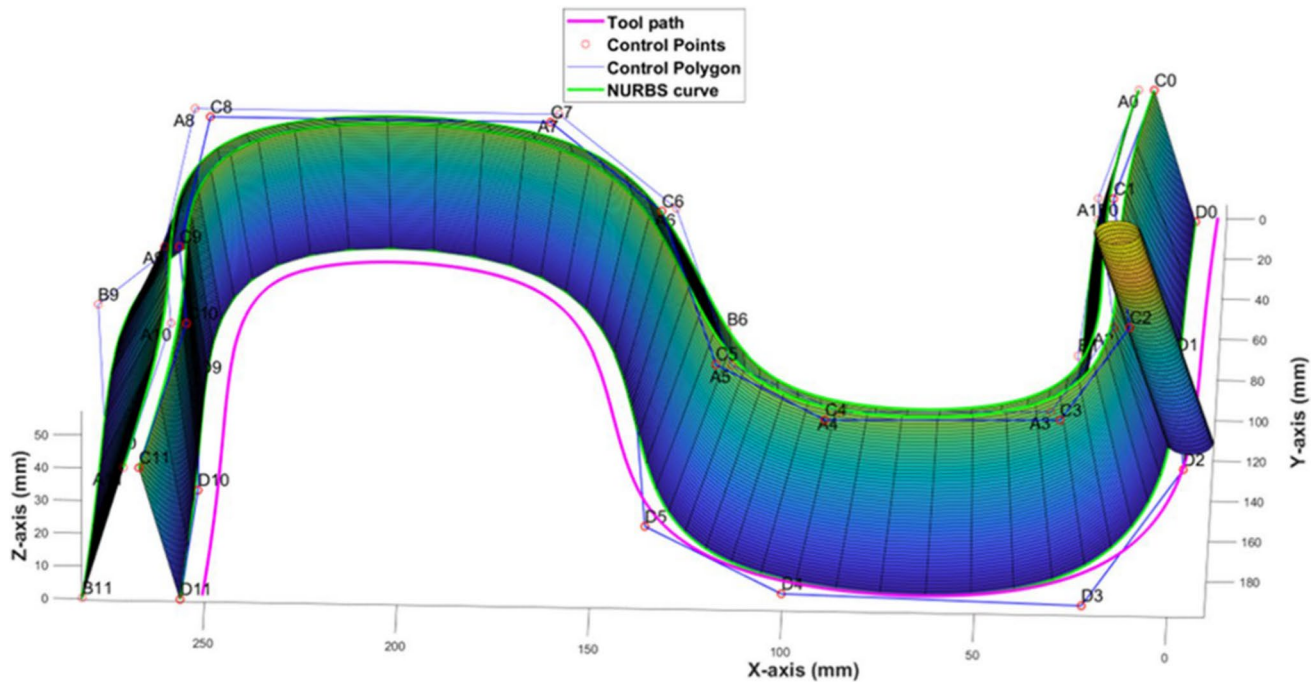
Development of the two surfaces of the S-cone and the tool movement on the surface [194]
